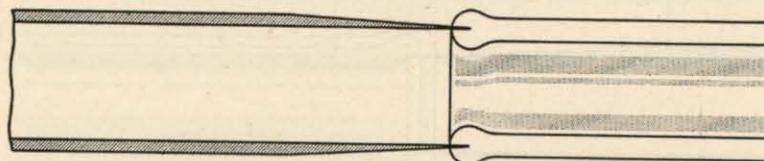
A SEAL MADE BY THRUSTING THE FEATHER EDGE OF THE COPPER INTO THE MOLTEN EDGE OF THE TUBE
